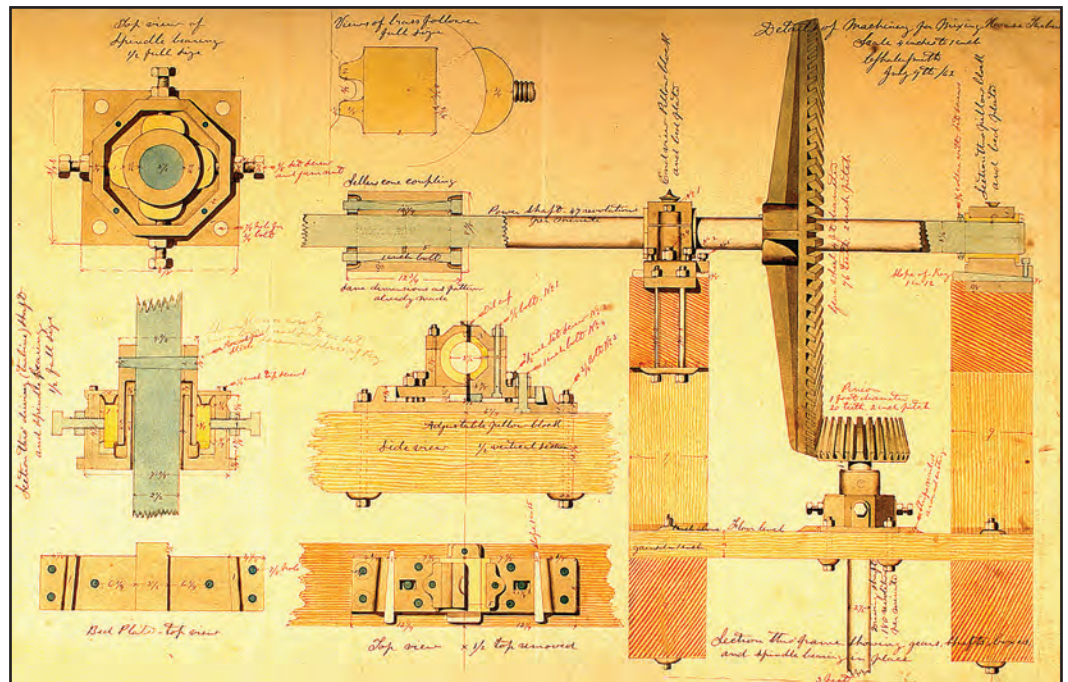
Machinery drawing for mixing house. (Blanchard Family Collection)
